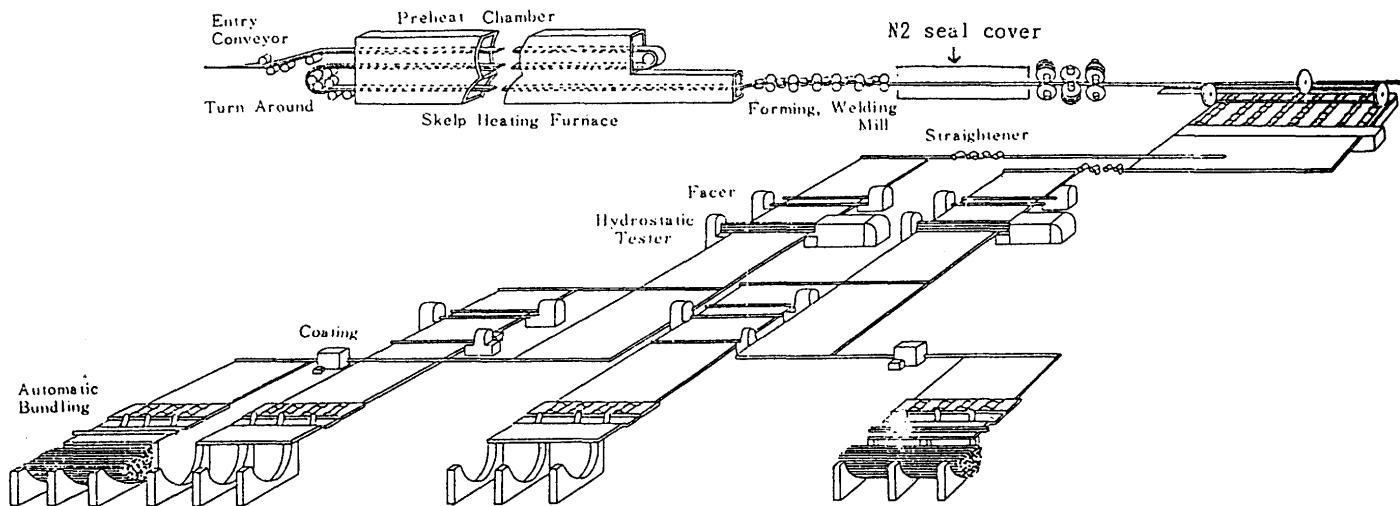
Layout of Butt-Welding Mill Line
